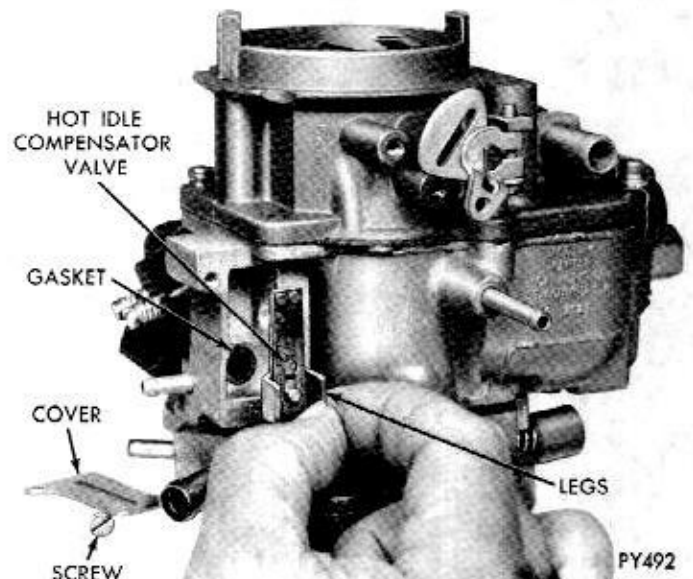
Removing or Installing Hot Idle Compensator Valve
